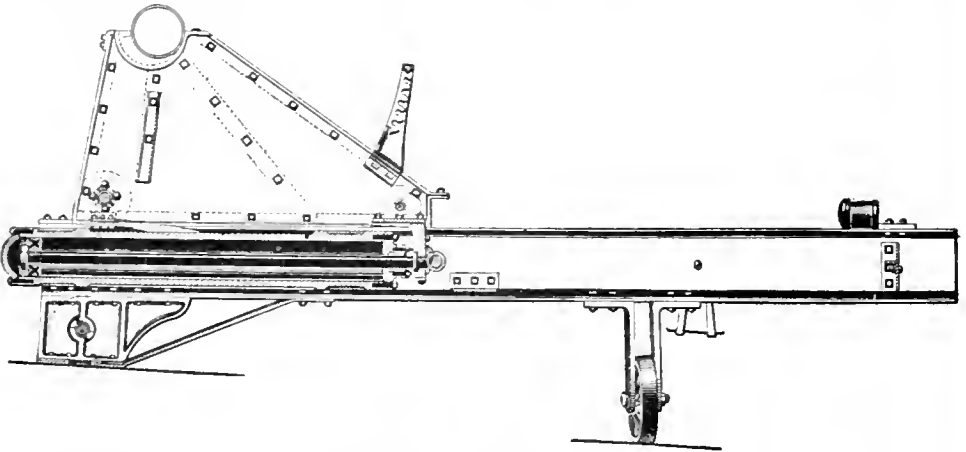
U.S. IRON BARBETTE CARRIAGE FOR 8-INCH RIFLE.
